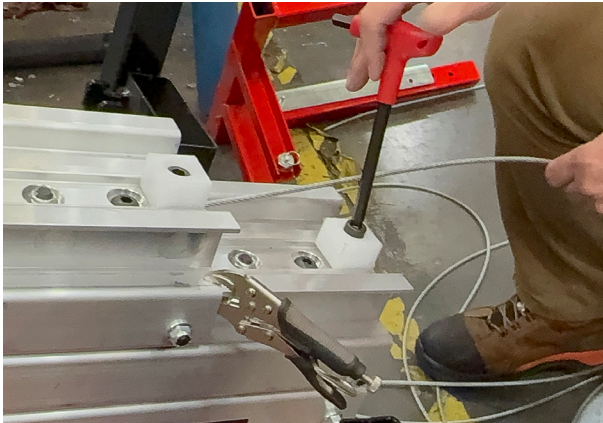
Clamping Mast Section and Removing Bottom Slide Block
